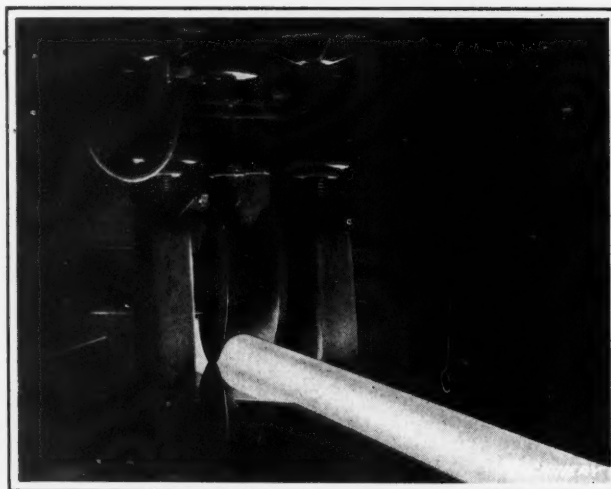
Pipe coming through Lap-welding Rolls over Mandrel
